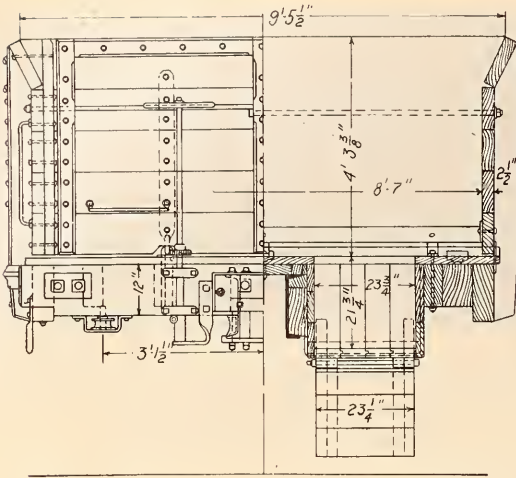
PART SECTIONAL END VIEWS, C., M. & ST. P. RY., COAL CAR.
